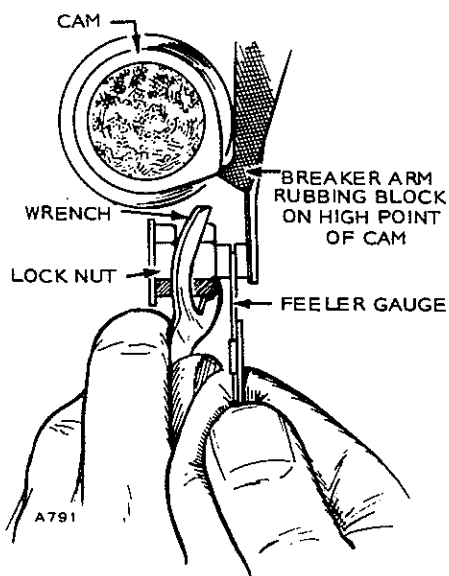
SETTING DUAL BREAKER POINTS
